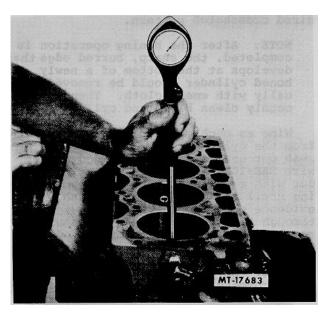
Checking Cylinder Bore using Dial Bore Gauge SE-2331
